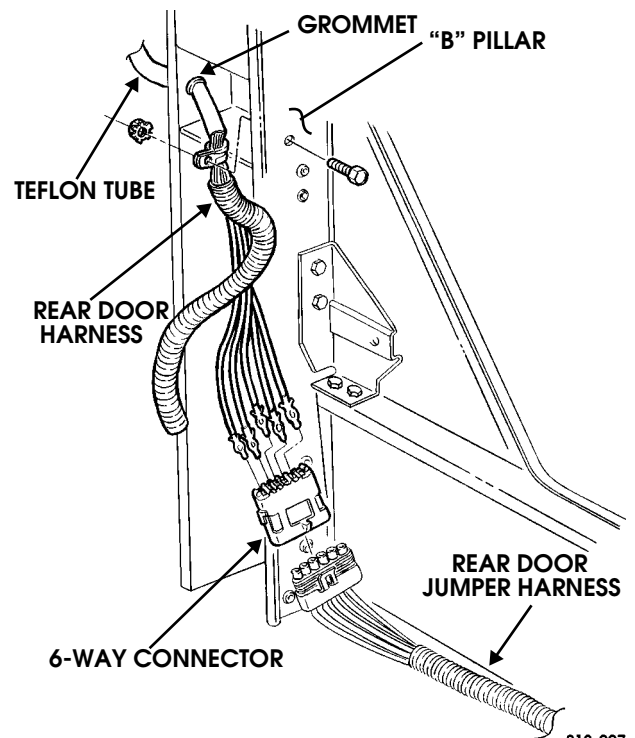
Rear Door Harness and Rear Door Jumper Harness
